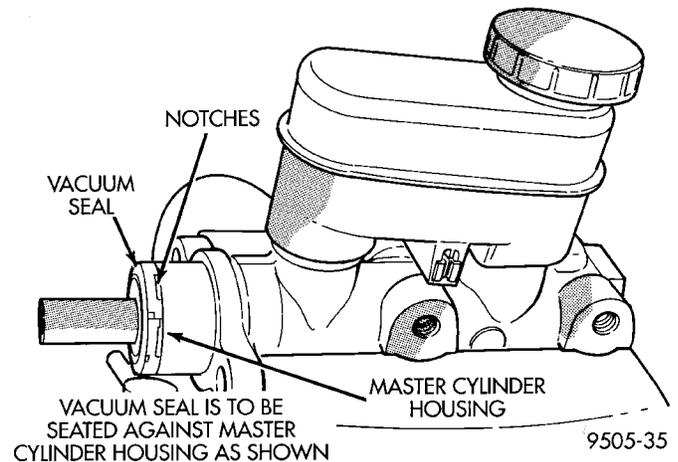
Vacuum Seal Positioned For Installing Master Cylnder
